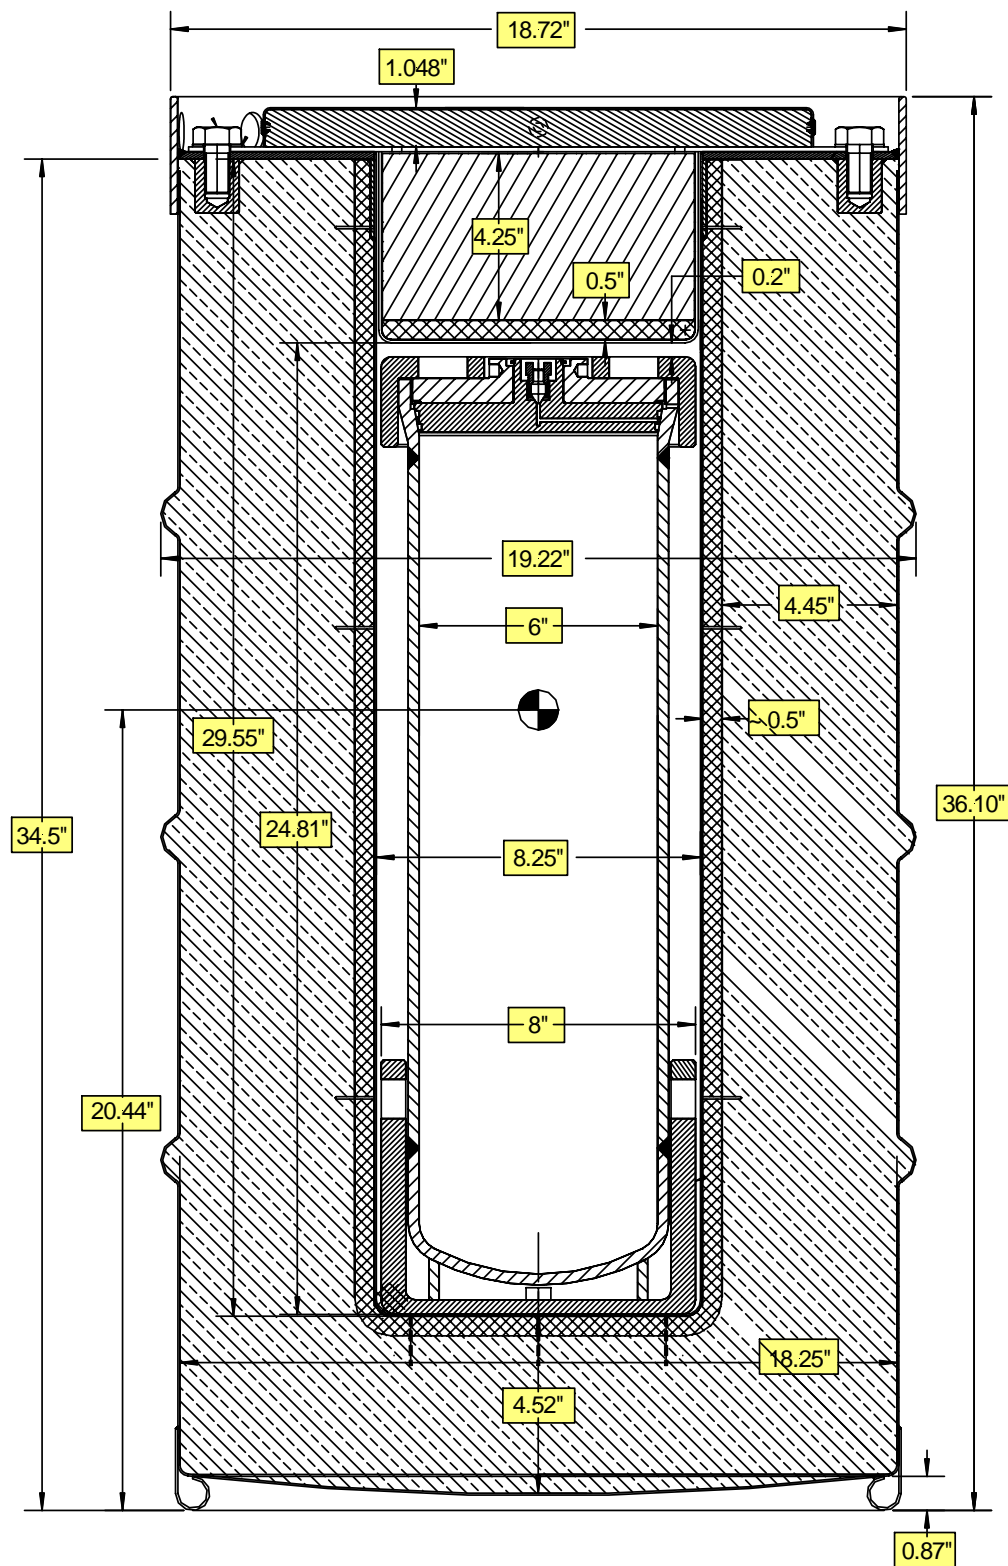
9977 6CV Packaging Configuration - Key Dimensions
